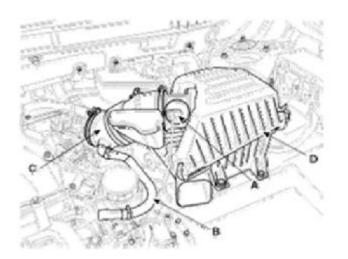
Identifying AFS Connector Courtesy of HYUNDAI MOTOR CO.
